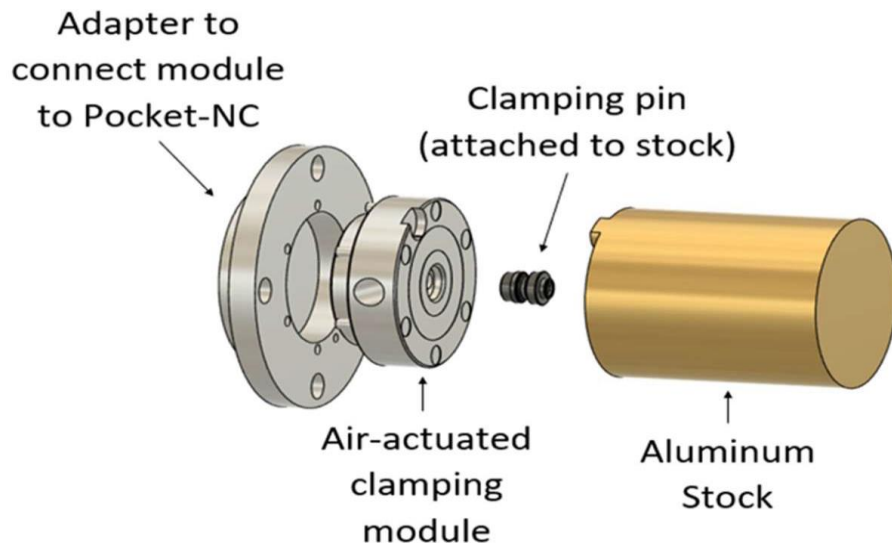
Expanded CAD model of zero-point fixturing solution for Pocket NC machine tool
